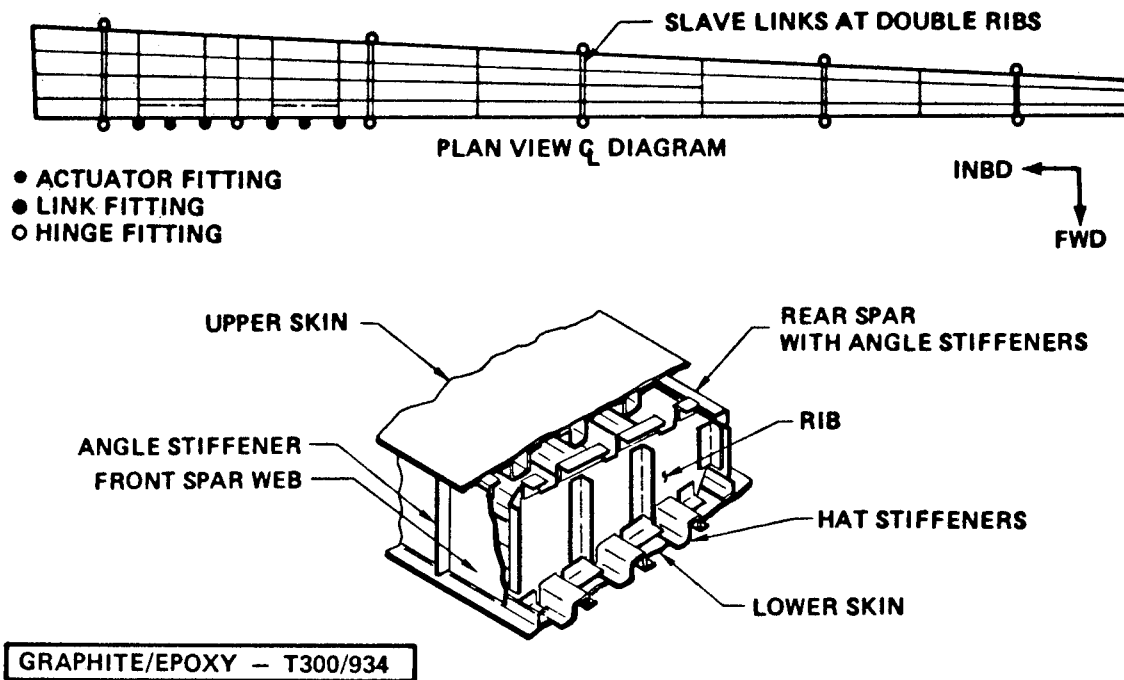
YC-14 Elevator Gr/Ep Skin/Continuous Stringer Design
